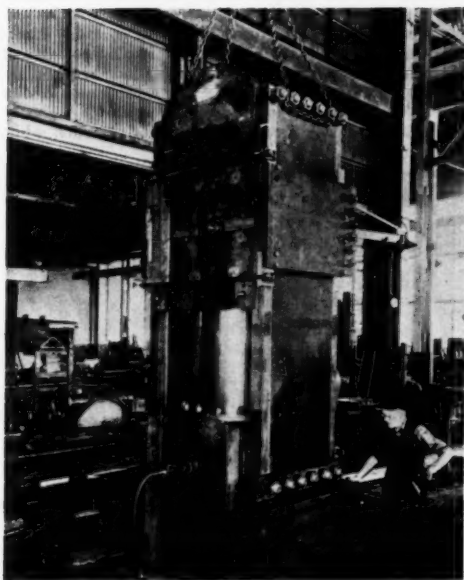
CYLINDER AND PISTON OF THIS HYDRAULIC PRESS ARE CAST IN DUCTILE IRON
